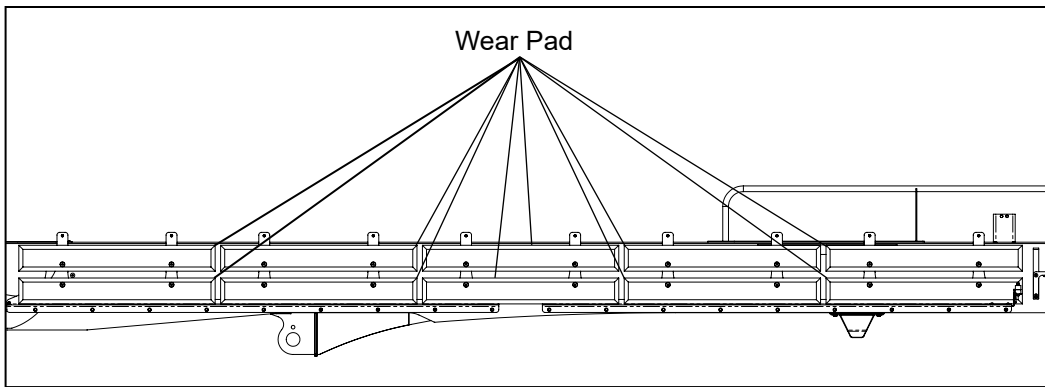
Inspecting the Wear Pads (Full View of 10)
